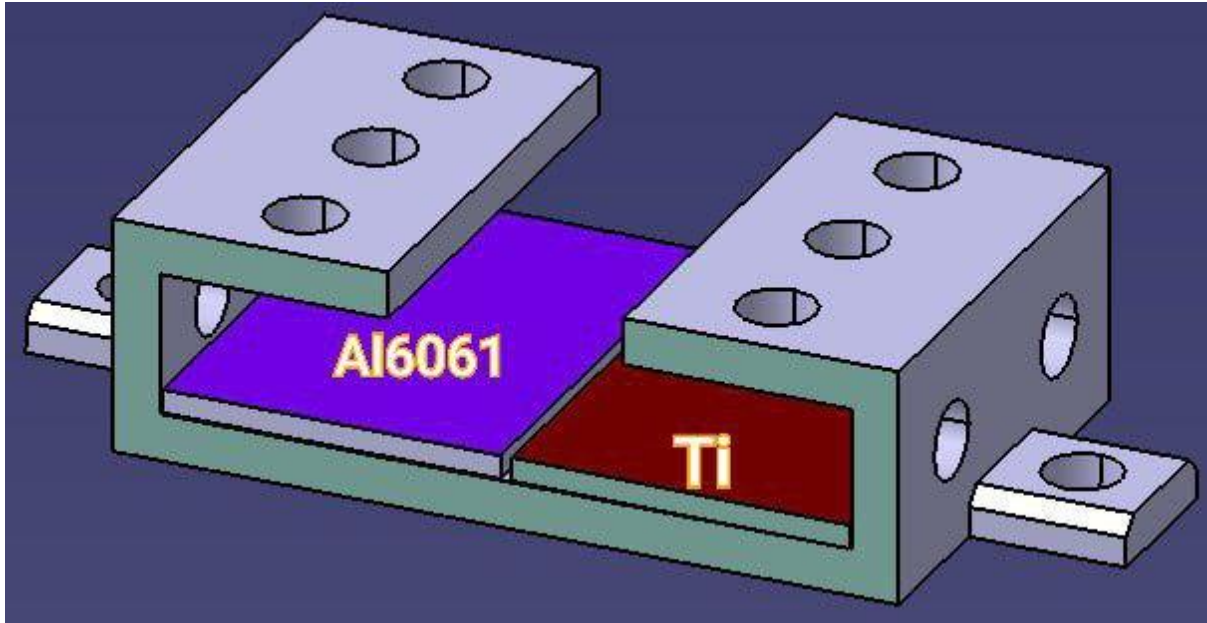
Welding material Al6061 & Ti and fixture mounted on CNC milling machine
